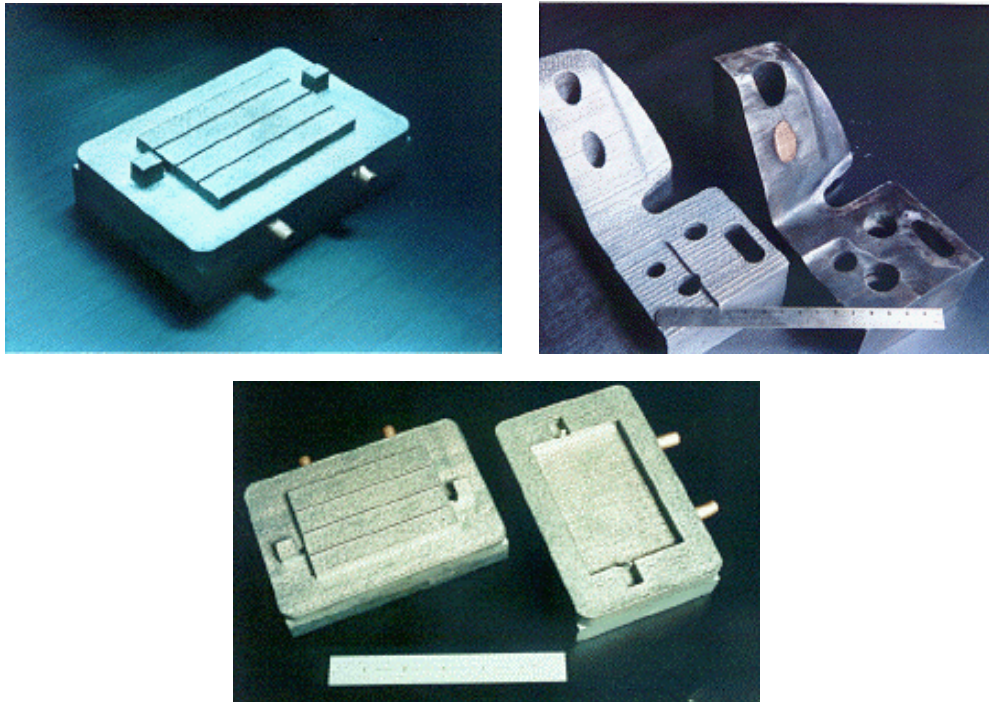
Dies manufactured using the Laser-aided Direct Metal Manufacturing Technology
